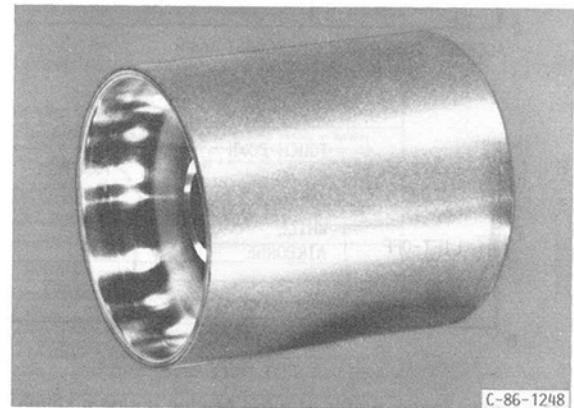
Gas bearing journal coated with PS200 and finished by diamond grinding (successfully completed 10,000 start/stop rubs in a foil gas bearing at temperatures up to 650°C)
